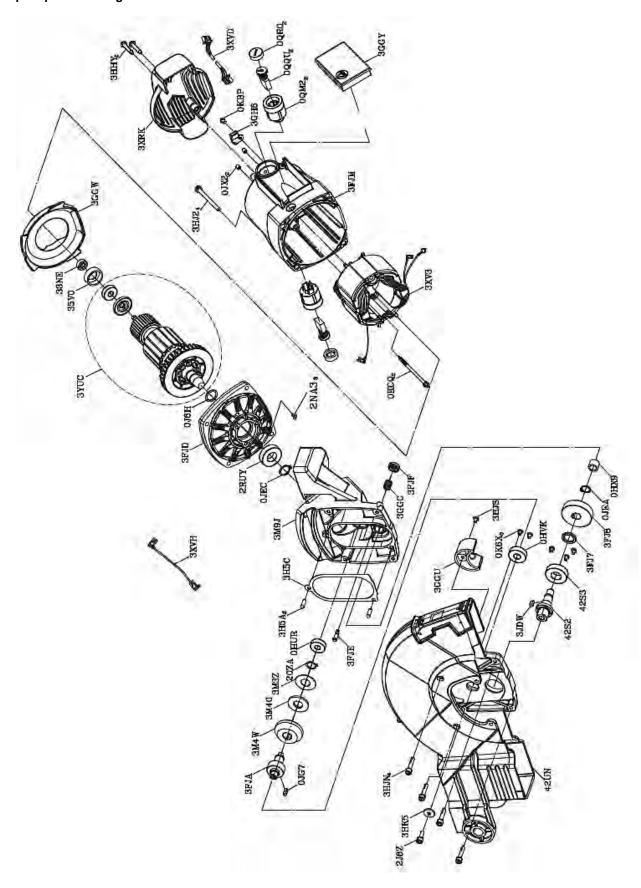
Spare parts drawing 2 KGZ 3050 VARIO
